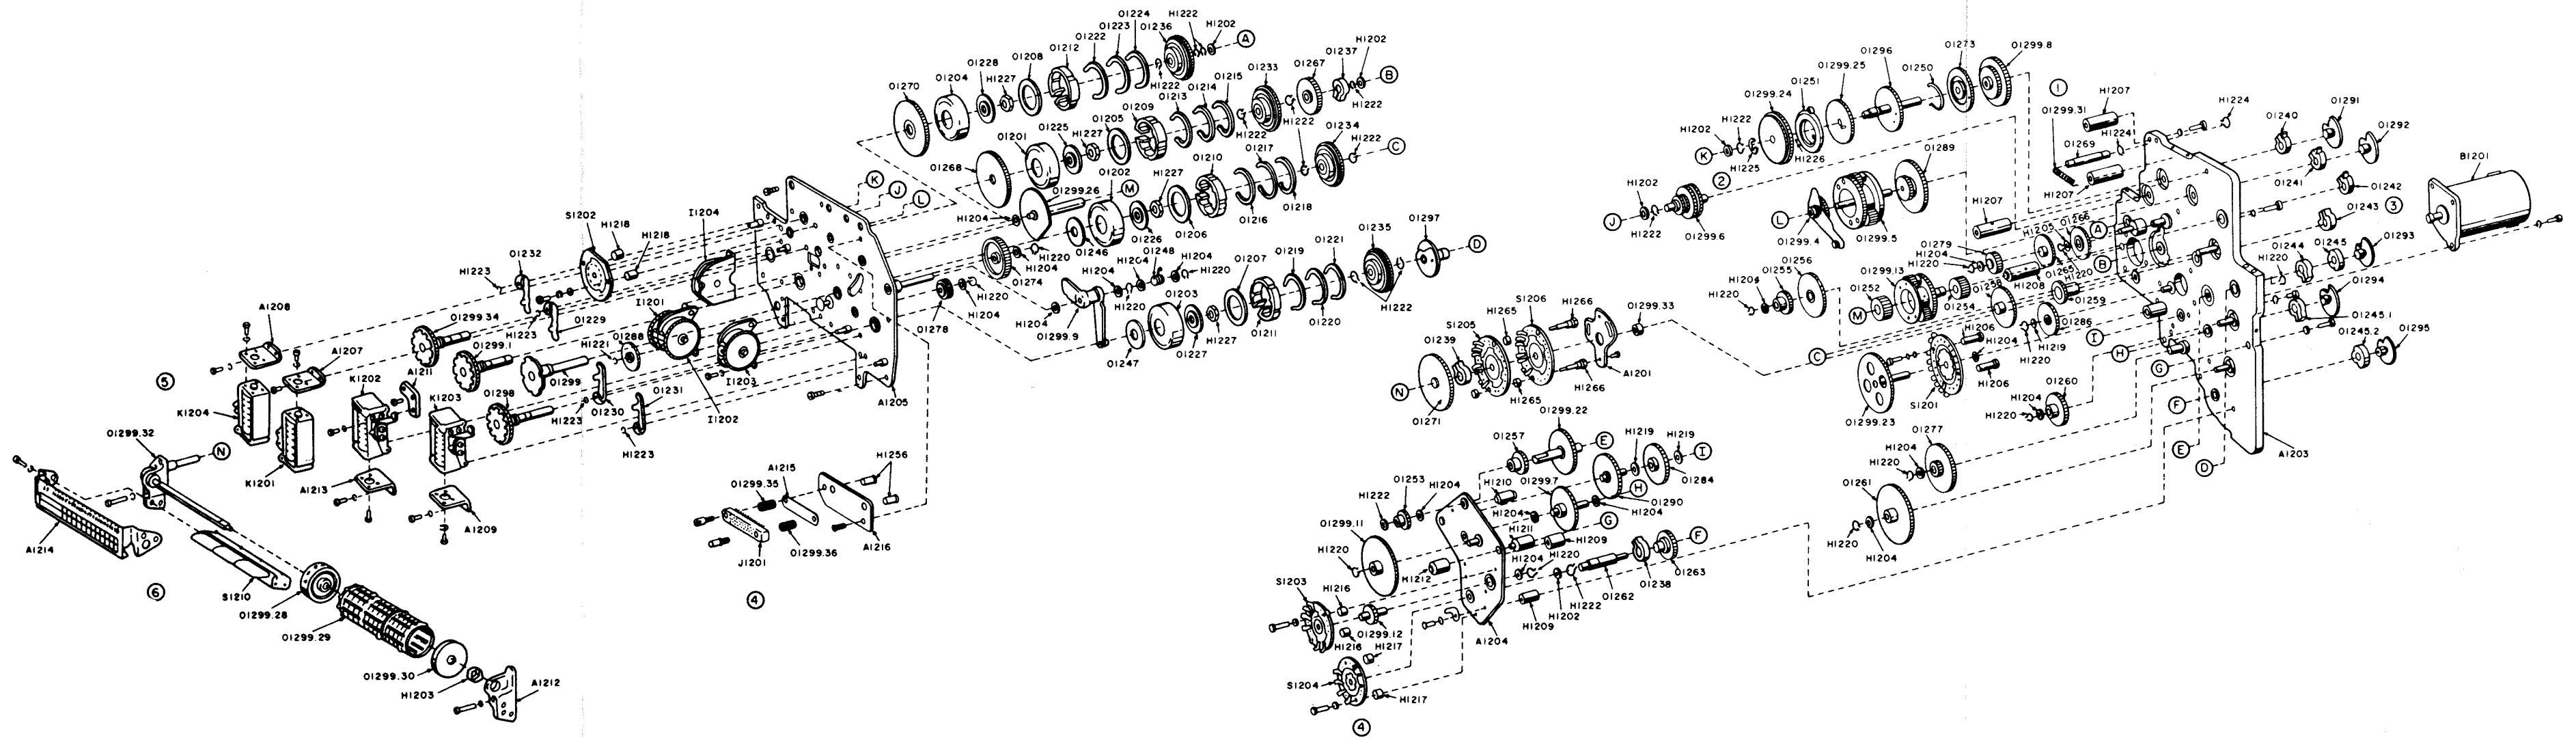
RT-581/URC-9, Frequency Selector, Exploded View
